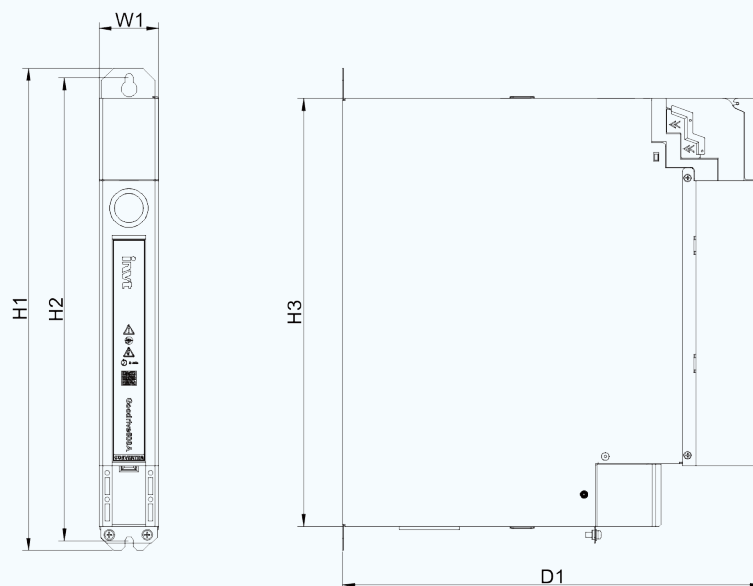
Wall mounting drawing for the 380V 1.5–7.5kW rectifier unit
